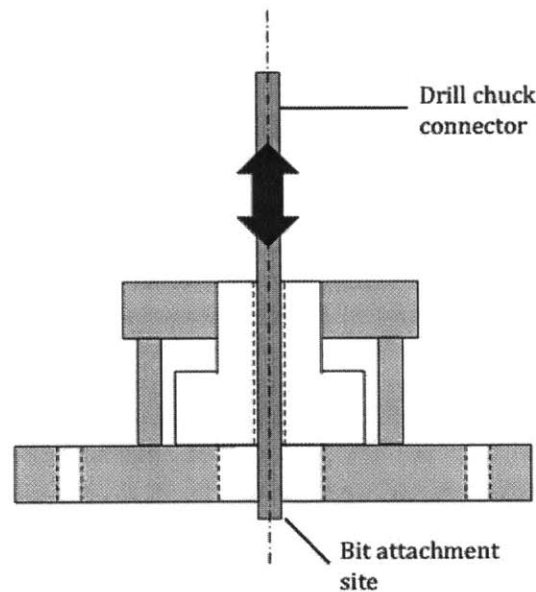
Diagram of jig for drilling the rotational pole hole in the main column. The bottom plate is flat; it is screwed directly onto the top surface of the 6x6 to ensure that the hole is perpendicular to that surface.
